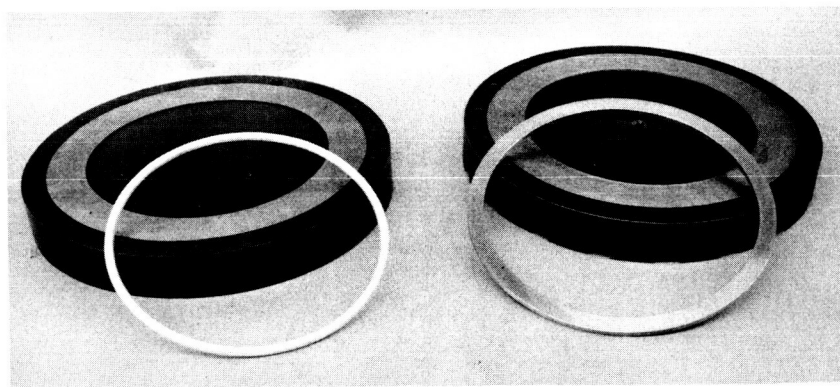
O-Ring Leak Test Flanges, Backing Ring, and Test Specimens
